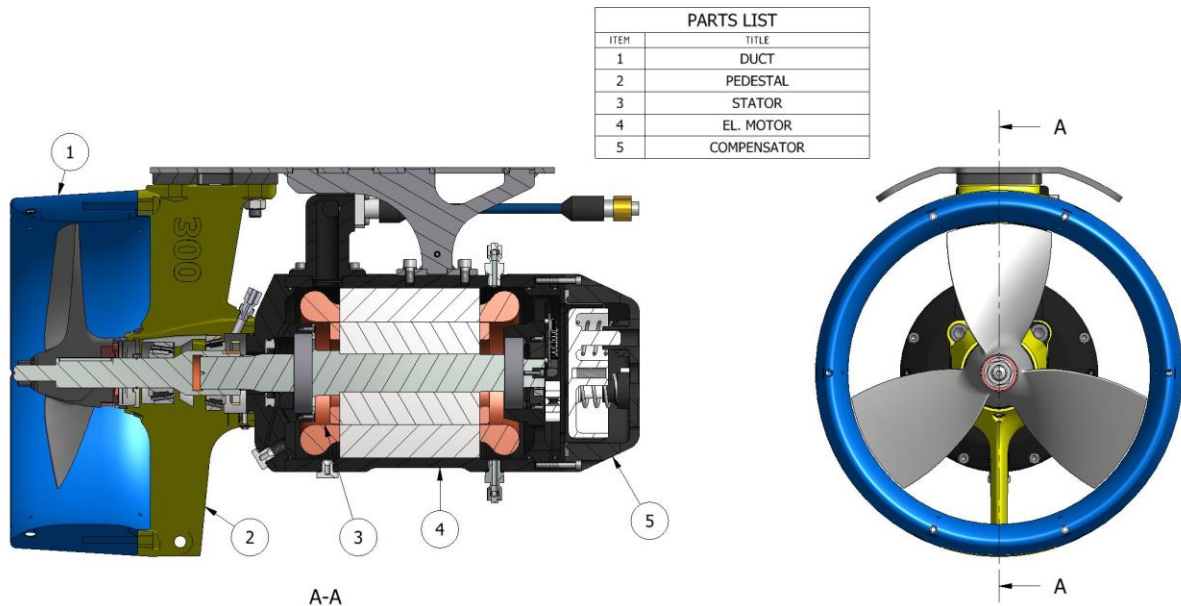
Cross-section of thruster (Courtesy of IKM Technology).
